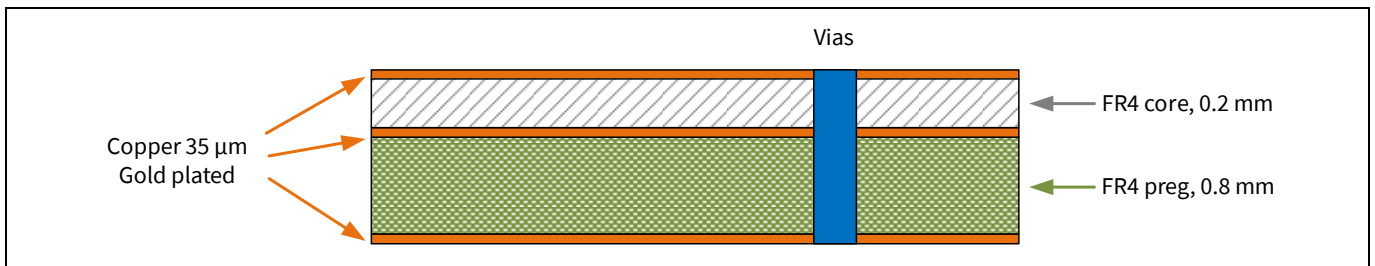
PCB stack information for the evaluation boards with PCB marking M130125 and M130225
